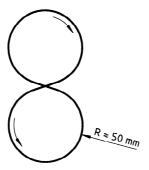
Figure-of-eight pattern of power tool movements on workpiece
